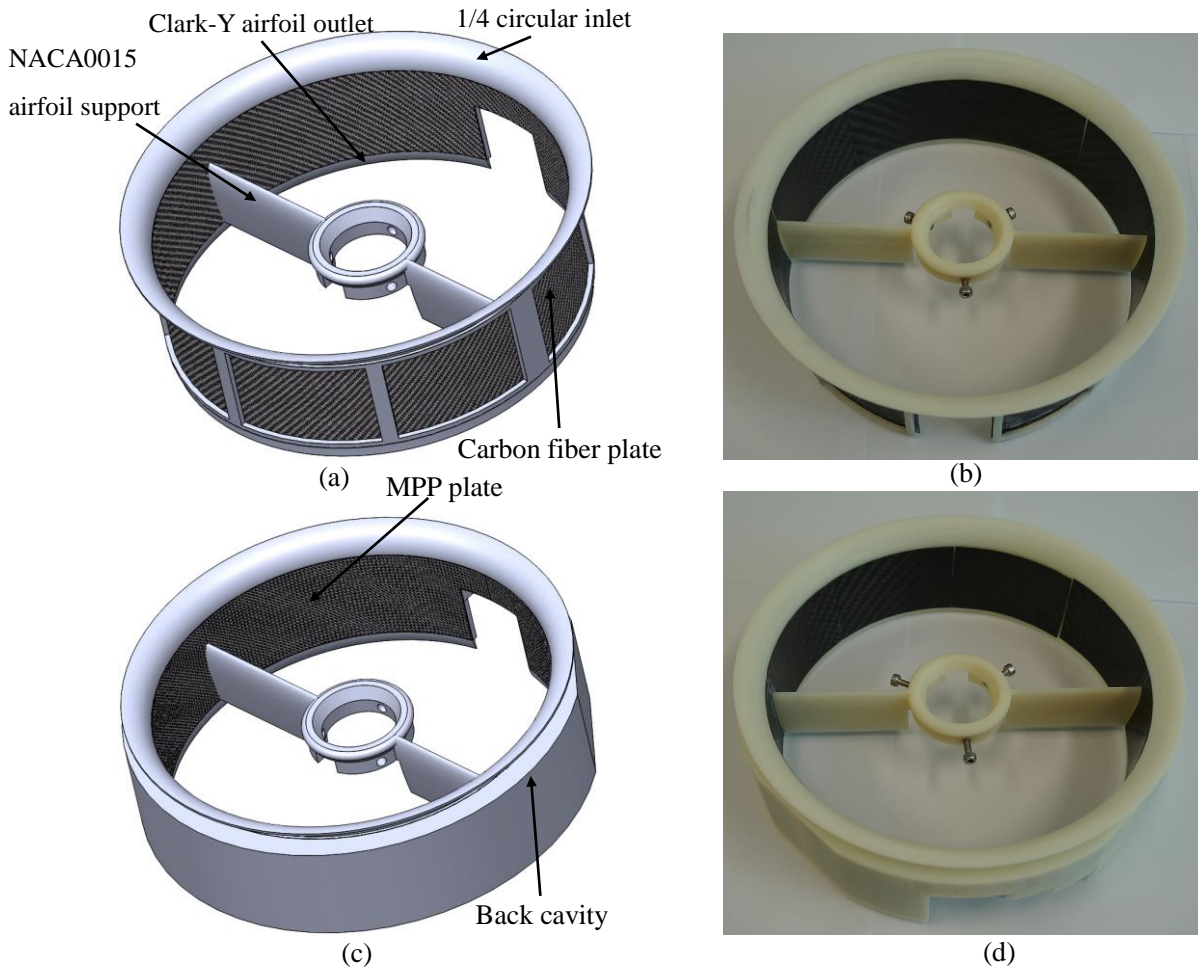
Shrouding duct designs: (a) 3D drawing and (b) picture of duct 1 with non-perforated internal wall; (c) 3D drawing and (d) picture of duct 2 with micro-perforated internal wall and 10 mm-depth back cavity.
